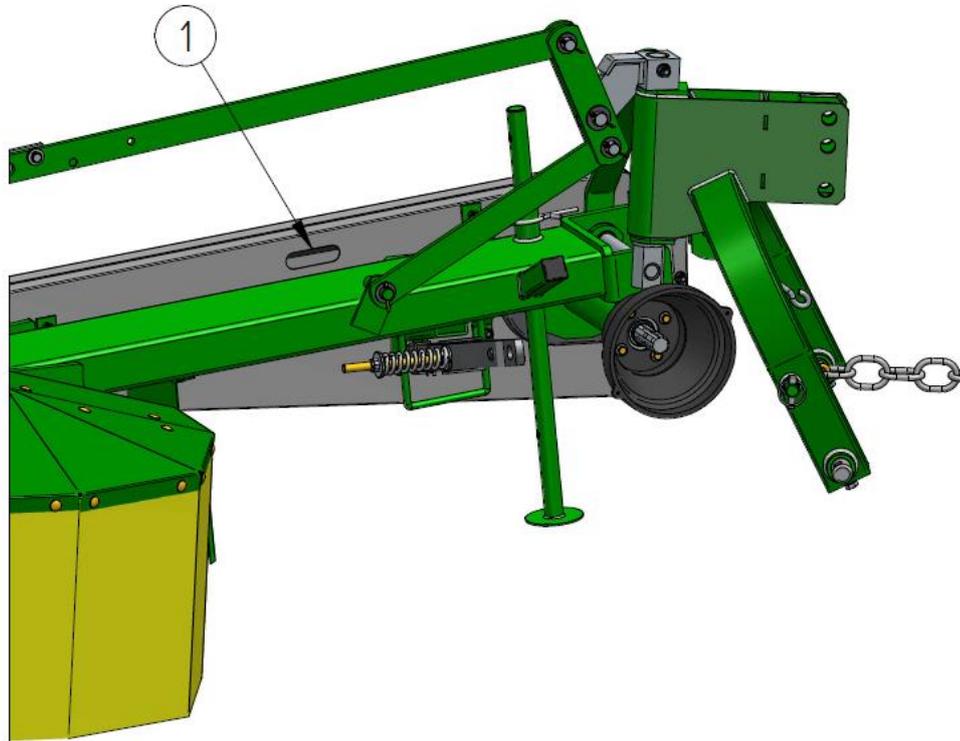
Checking of the proper adjustment of V-belts tension: 1) inspection opening for checking the tension of the belts
